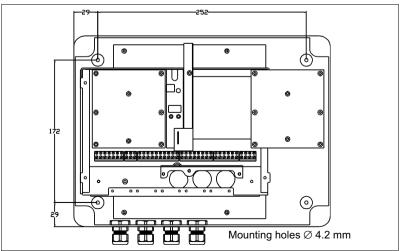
Mounting hole locations: MTT6000-F51-S1
